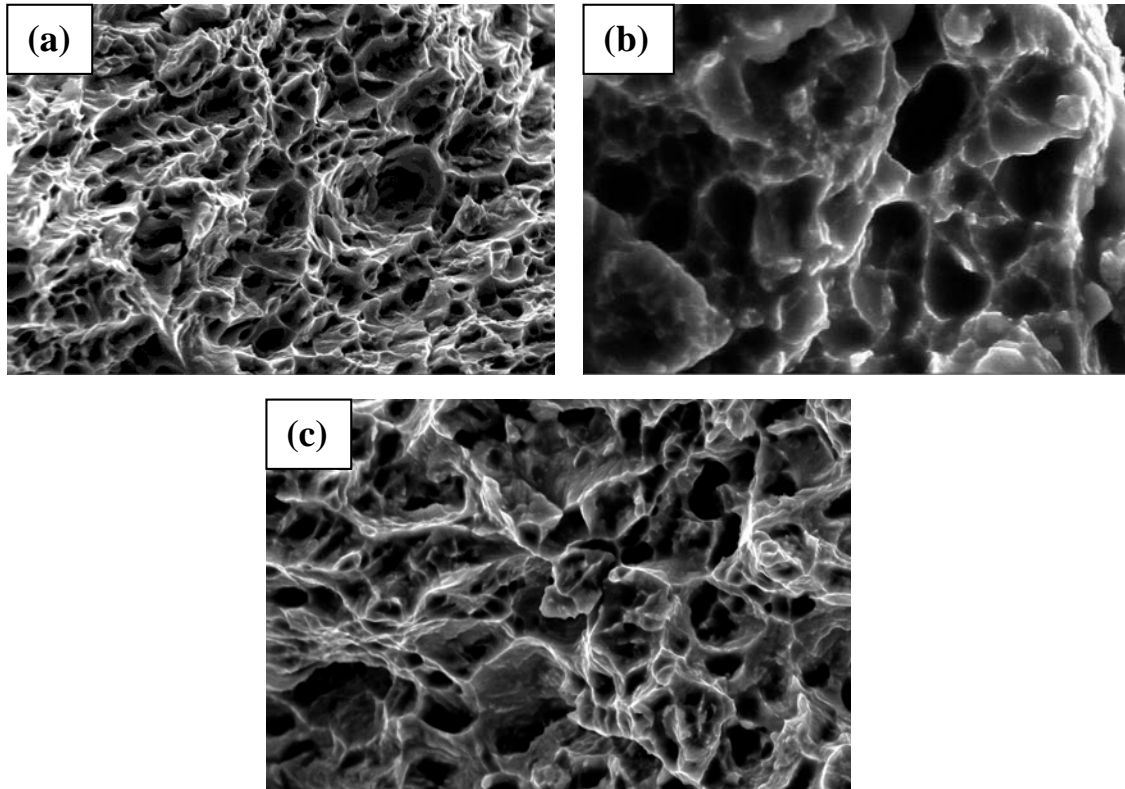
SEM photographs of specimen fracture surface at 5000x magnification (a) steel; (b) aluminium; (c) brass
